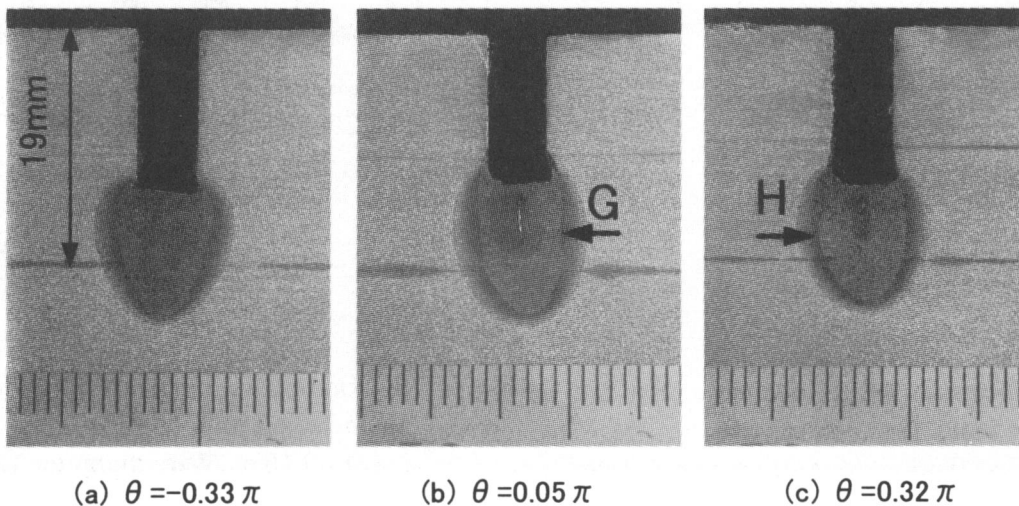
Penetration shapes in synchronized control method ( I-gap groove of width 5.0 mm , Welding speed 7.5 mm/s , Wire diameter 1.2 mm , CO<sub>2</sub> shielding gas ).
